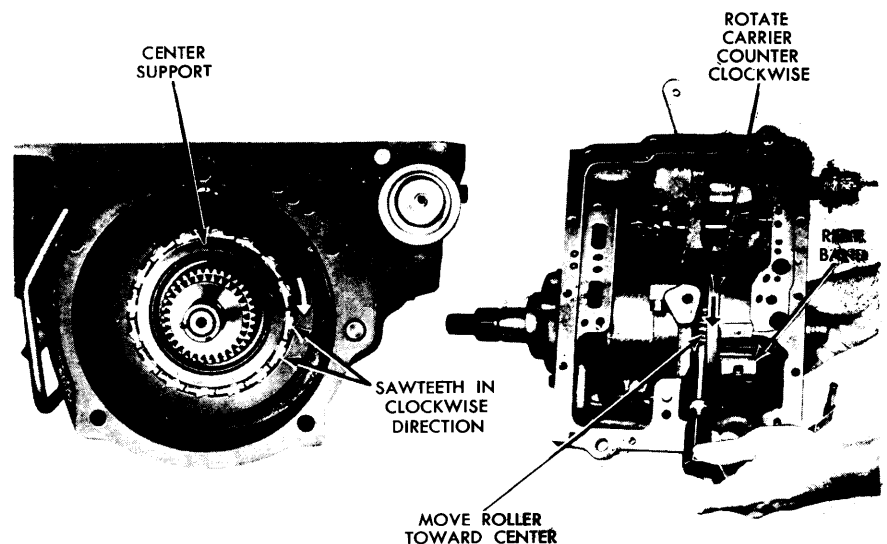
Planetary Clutch Installation in Carrier—Using Center Support Not Chamfered
